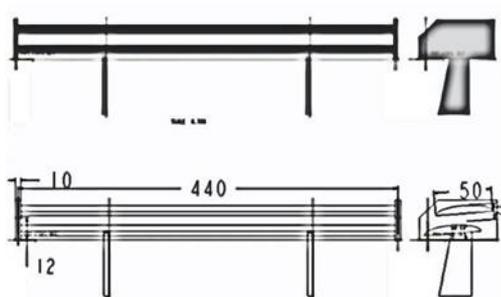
SP3 - A pedestal spoiler with two blades, the higher blade located in the rear and the lower blade located in the front.
